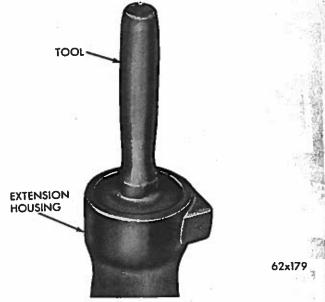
Installing Output Shaft Bearing (Tool C-3204)
